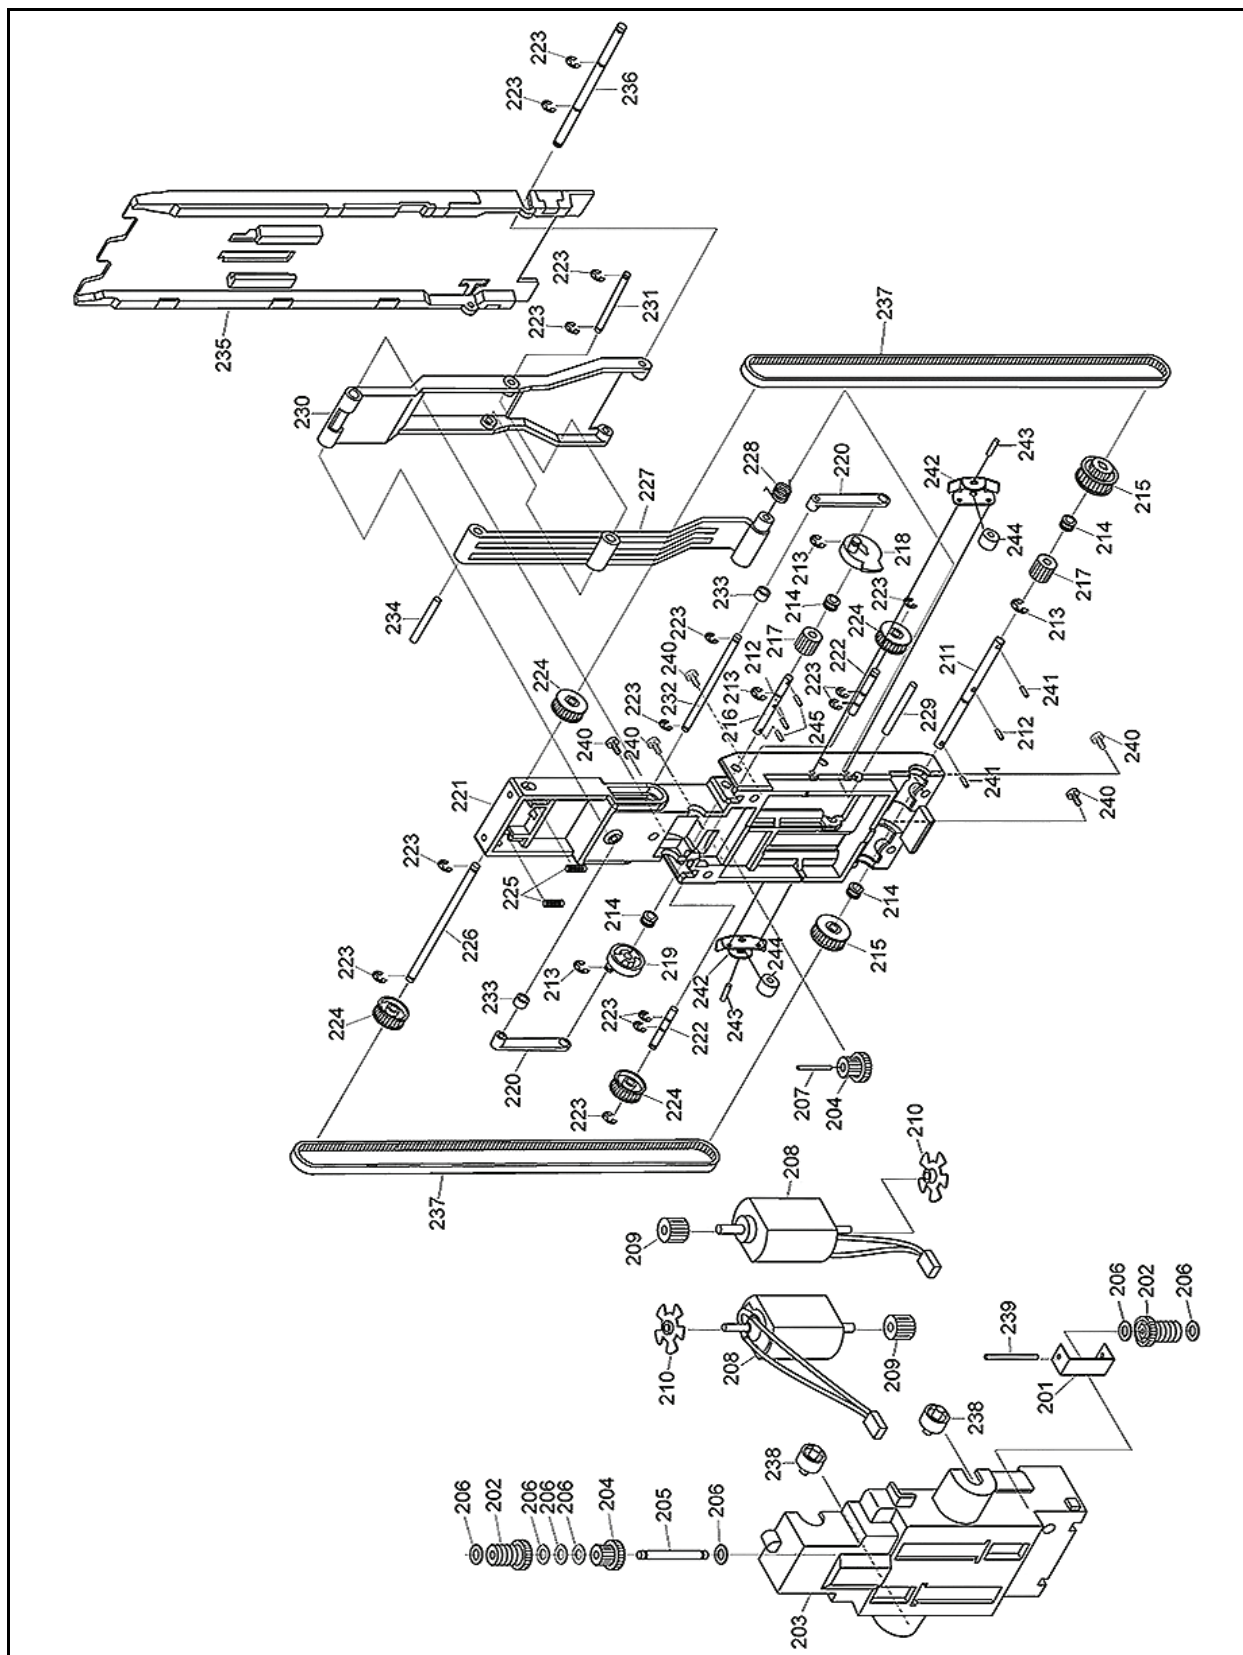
Pusher Mechanism Assembly Exploded View Diagram
